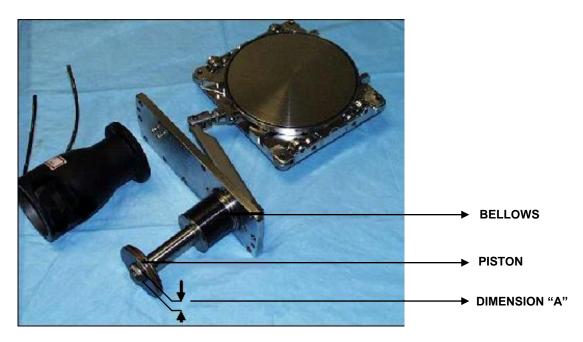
BELLOWS AND PISTON SHOWN WITH ACTUATOR HOUSING REMOVED
